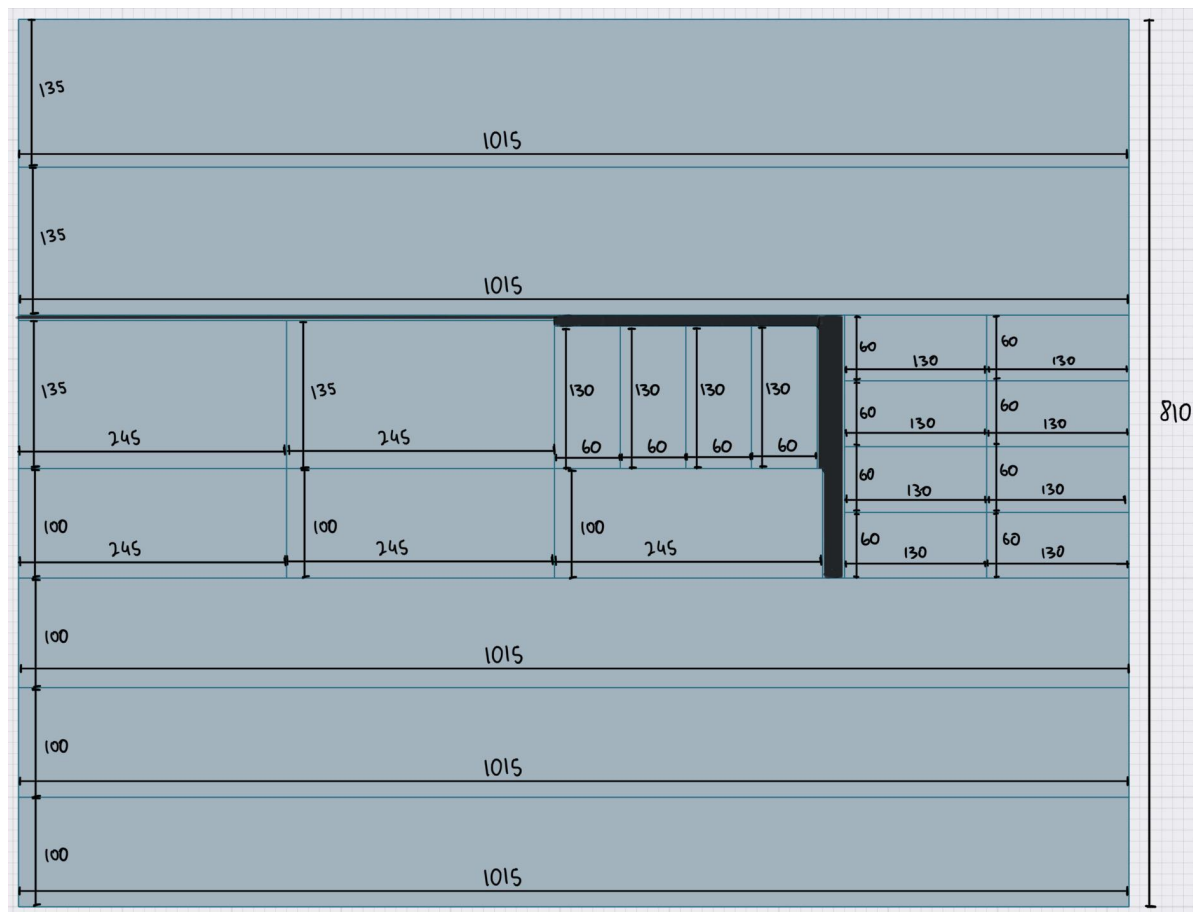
Matboard sectioning blueprint showing how we will cut the matboard to create all the pieces of the board
